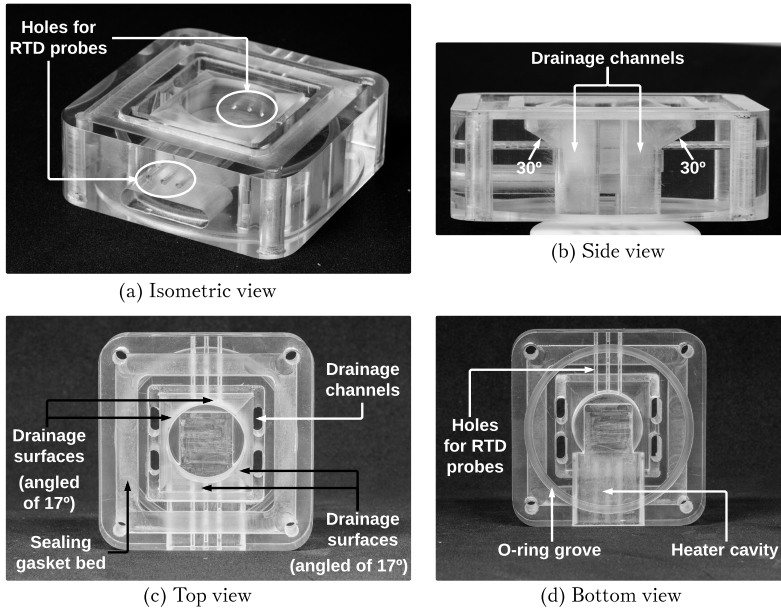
Insulation and drainage unit: views presenting different design details.
